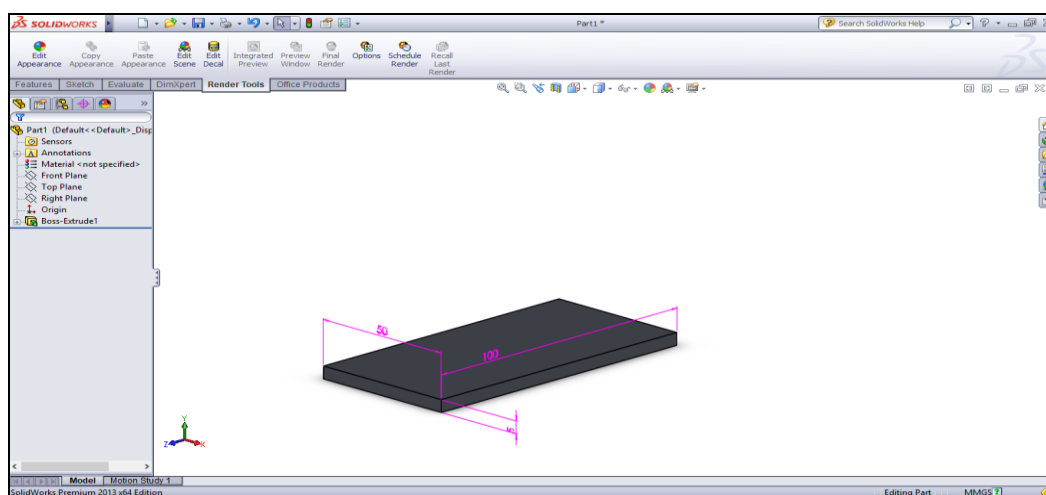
The rectangular specimen which was used for testing on UNIVERSAL TESTING MACHINE 5906.
